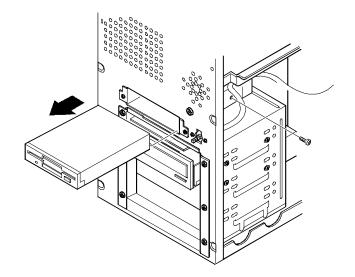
8 Removing the 3½-Inch Diskette Drive
